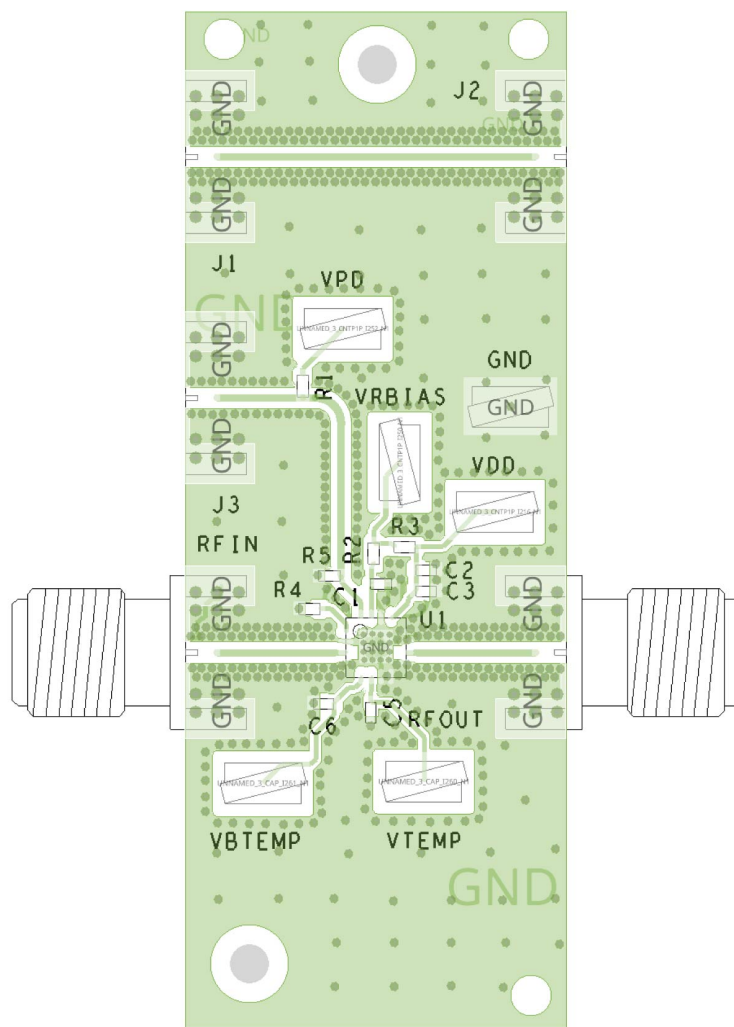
ADL8108-EVALZ Assembly Drawing (J1, J2, and J3 Are Not Installed)
